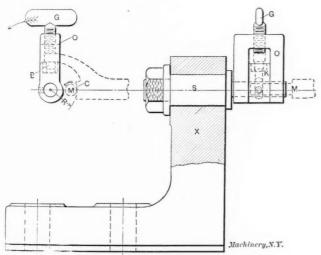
Fixture for Milling Seat for Nut on Wrench.
